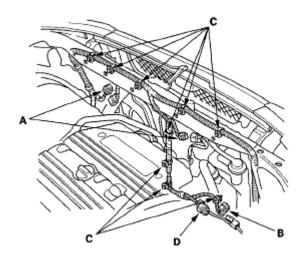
Identifying Fan Motor Connectors, Engine Coolant Temperature Sensor Connector, Harness Clamps And A/C Compressor Clutch Connector Courtesy of AMERICAN HONDA MOTOR CO., INC.
